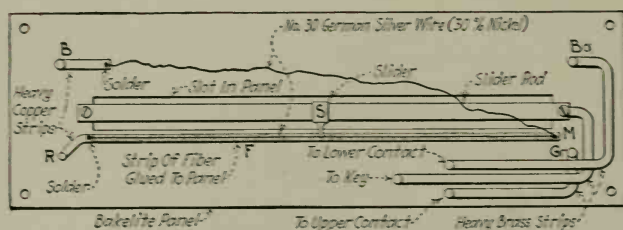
Bottom view of the fault-finder panel shown in Fig. 41.
